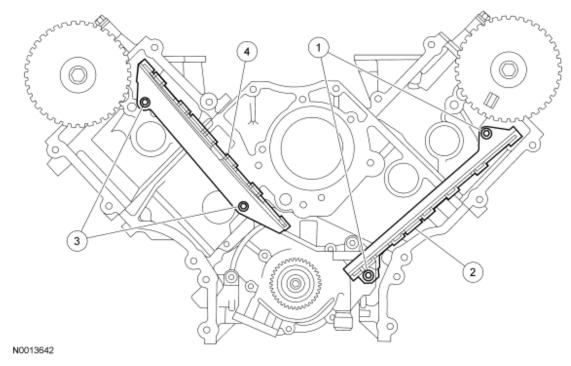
Identifying Timing Chain Guides Courtesy of FORD MOTOR CO.
